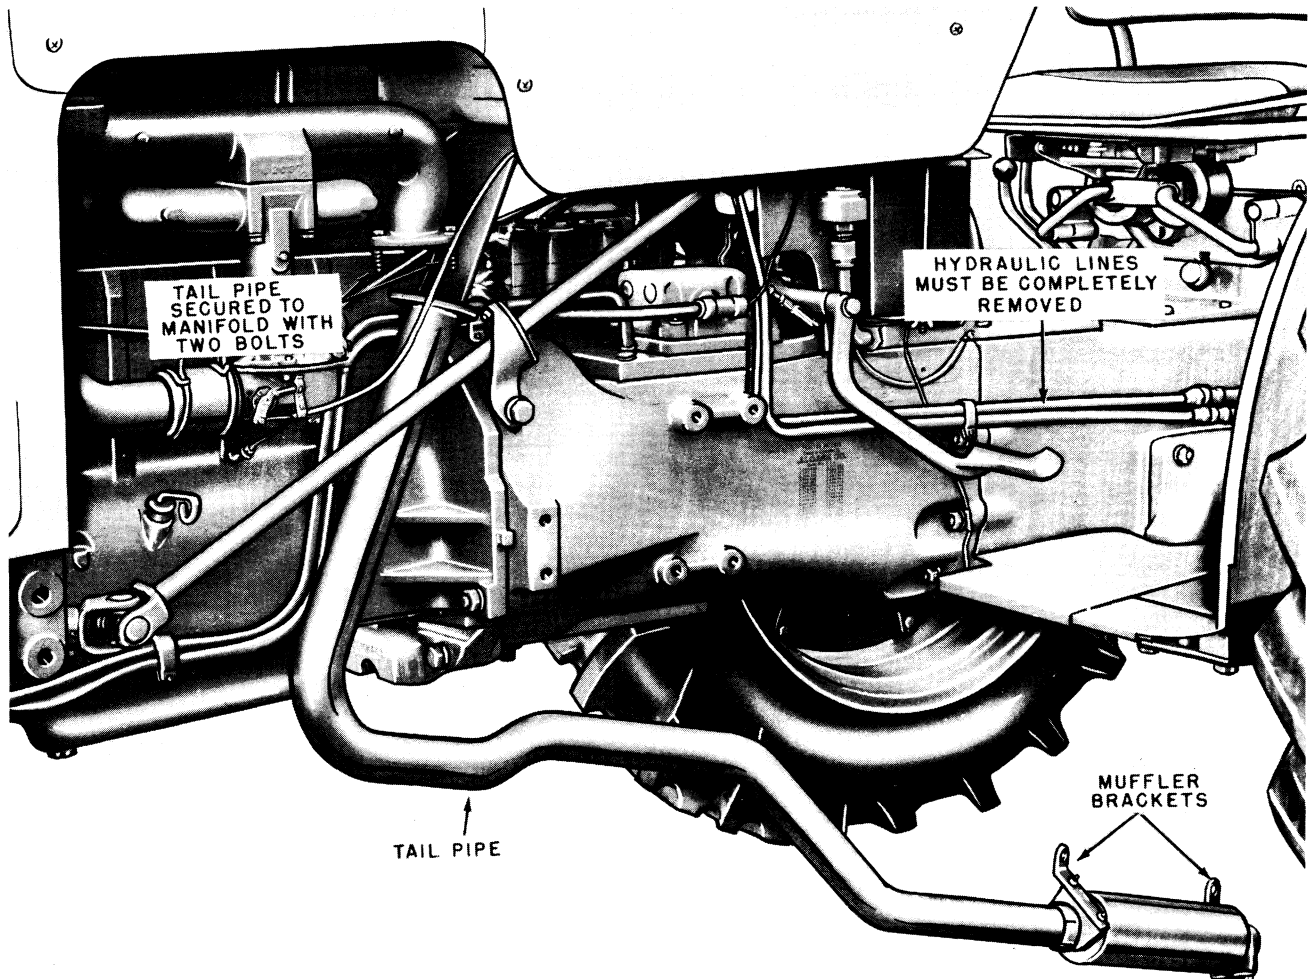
Underneath Muffer and Tail Pipe Assembly Being Removed
